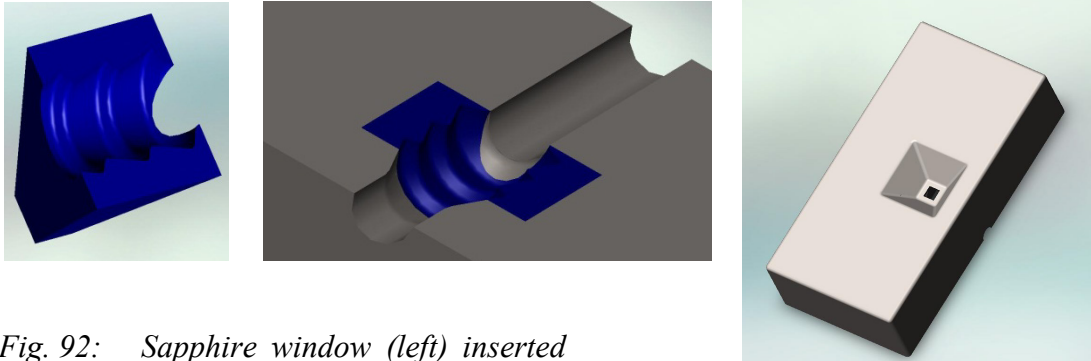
Sapphire window (left) inserted into the tool (centre), and back side view of a possible forming tool (right)
